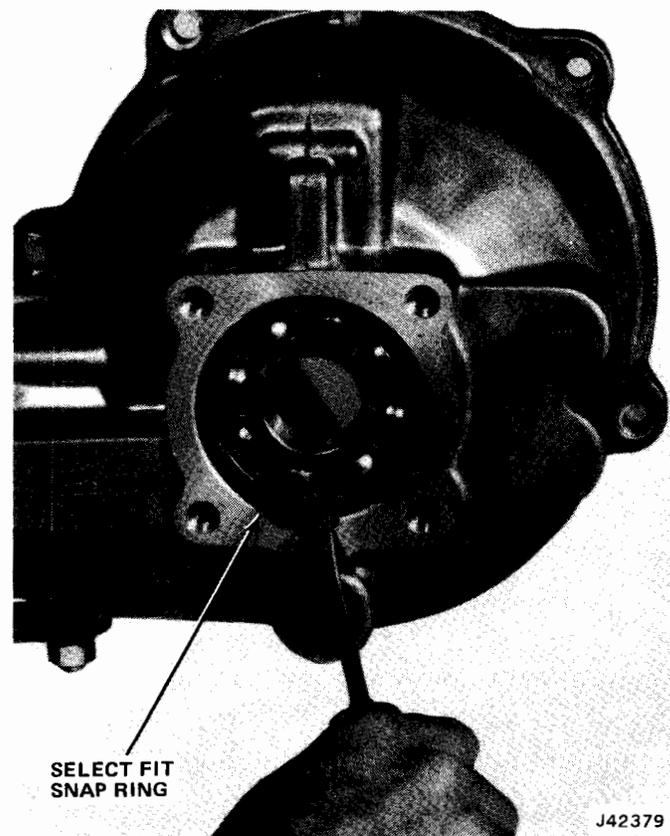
Removing Rear Annular Bearing Snap Ring
